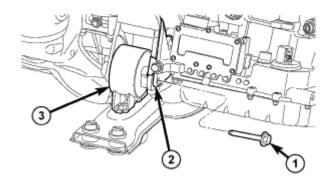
Identifying Engine Mount/Cross Member Courtesy of CHRYSLER LLC
